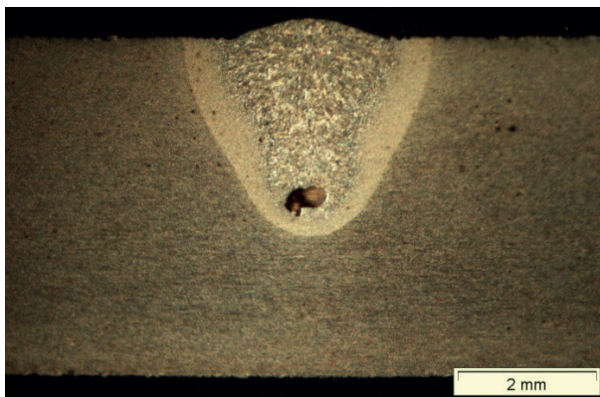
Macrostructure on cross section of the bead-on-plate weld produced at laser power 1000 W and welding speed 500 mm/min (heat input of 120 J/mm)
